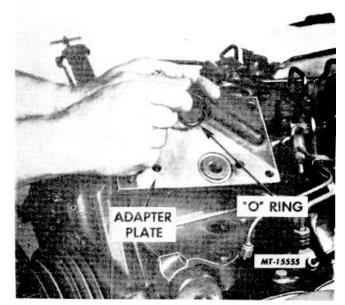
Removing Air Compressor Adapter Plate and "O" Ring 18. Remove crankcase ventilator hose and clamps from
